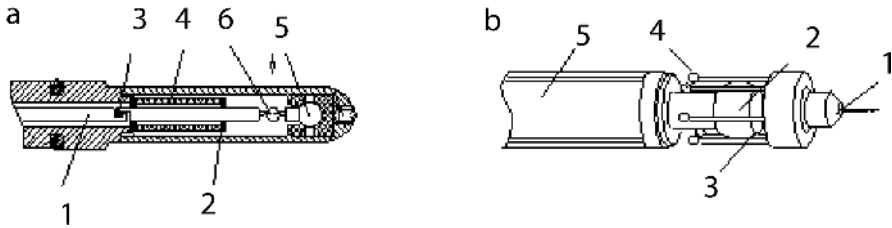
TEM-SPM designs a Stepper motor based TEM-holder (not to scale): 1 – shifting rod by stepper motor, 2 – graphite rings, 3 – clutch, 4 – piezo tube, 5 – preadjustment ball, 6 – electron beam. b Ball-type of the inertial slider: 1 – tip holder, 2 – sapphire ball, 3 – sliding rods, 4 – counter weight, 5 – piezo tube
